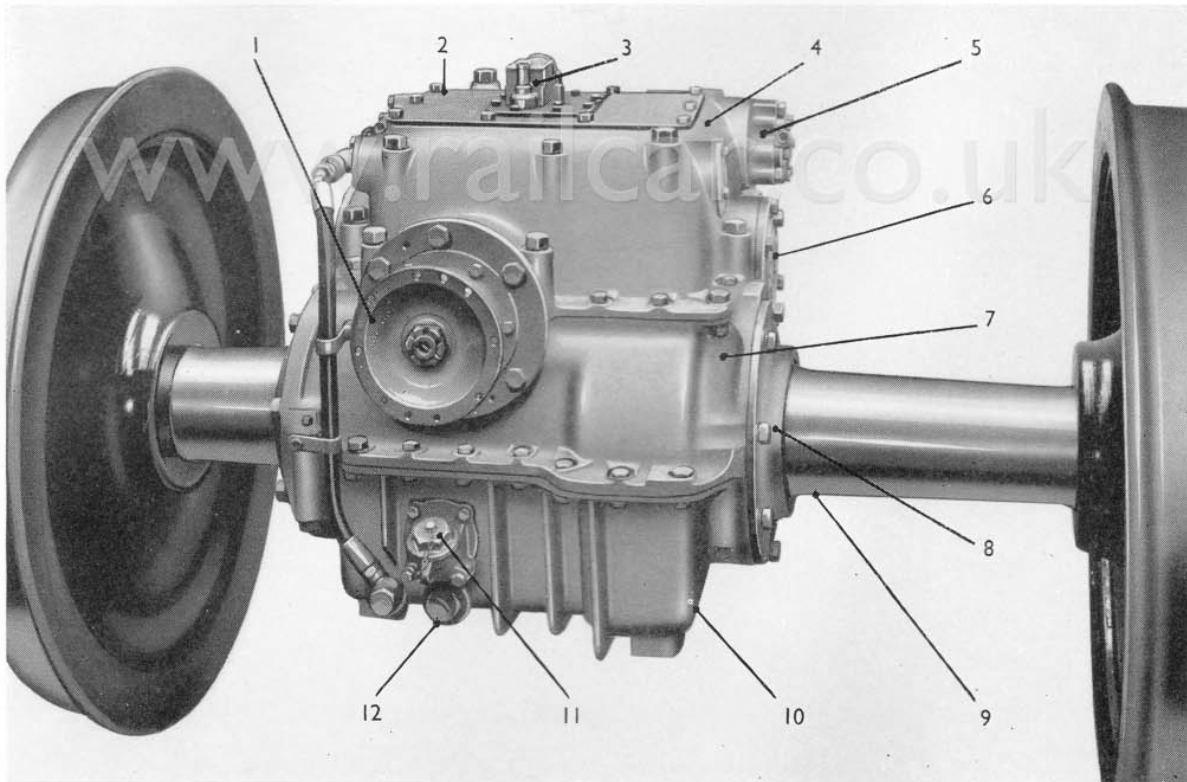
VIEW OF COMPLETE UNIT MOUNTED ON AXLE
